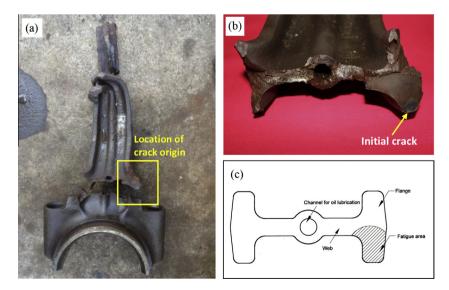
The failed connecting rod: (a) location of initial crack, (b) magnified photograph of fractured surface outlined by a square in this figure (a), and (c) l-section of the connecting rod.
